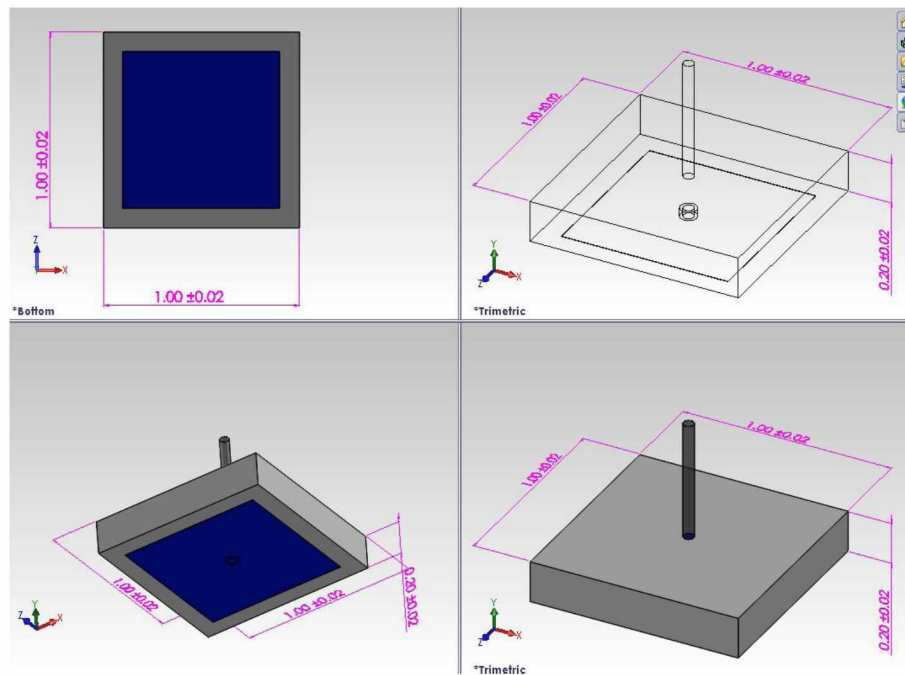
SolidWorks drawing of SR-3000 PDMS bonding test sample. (Dimensions in inches).
